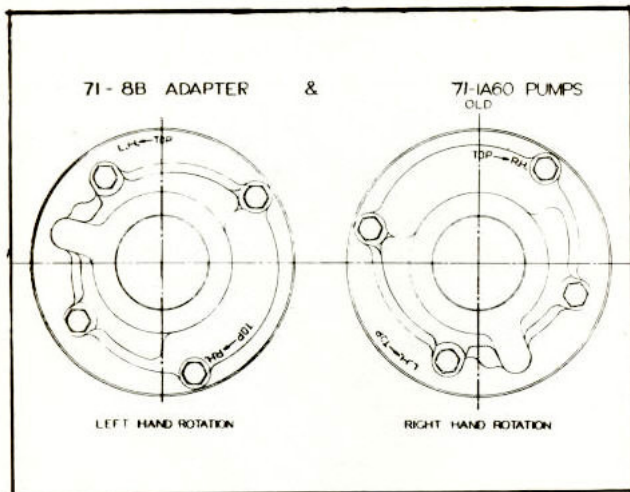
Orientation Markings for Old 71-1A60 Pump Assembly on 71-8B Adapter
